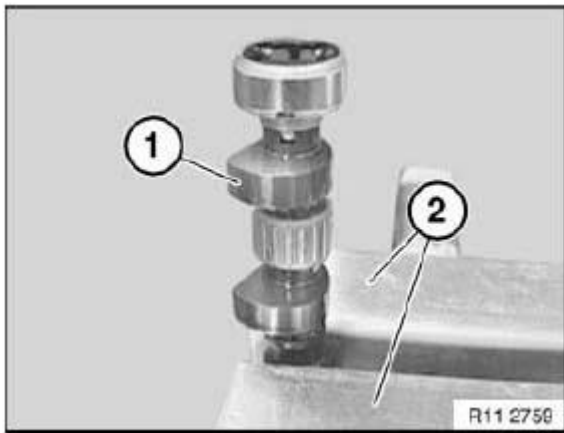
Clamping Eccentric Shaft Illustrated With Protective Jaws In Vice
